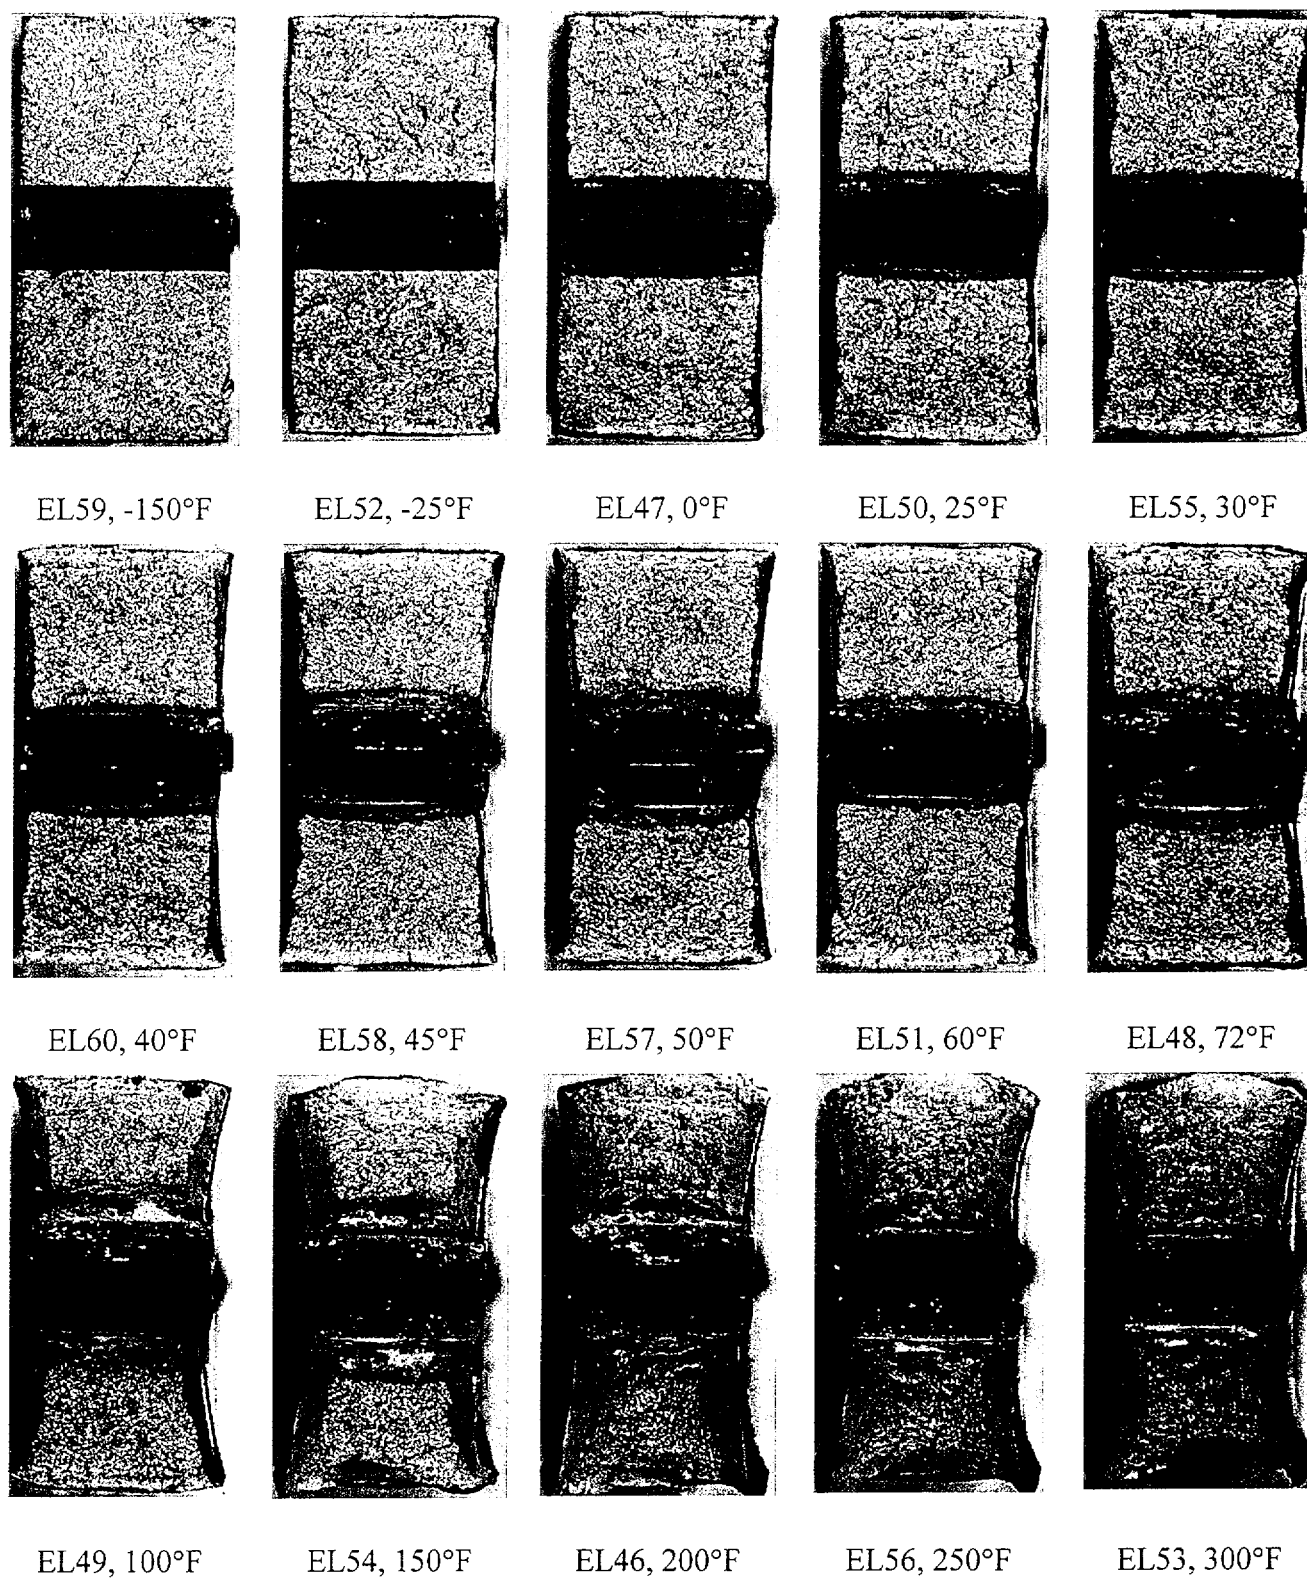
Charpy Impact Specimen Fracture Surfaces for Millstone Unit 3 Reactor Vessel Intermediate Shell Plate B9805-1 (Longitudinal Orientation)
